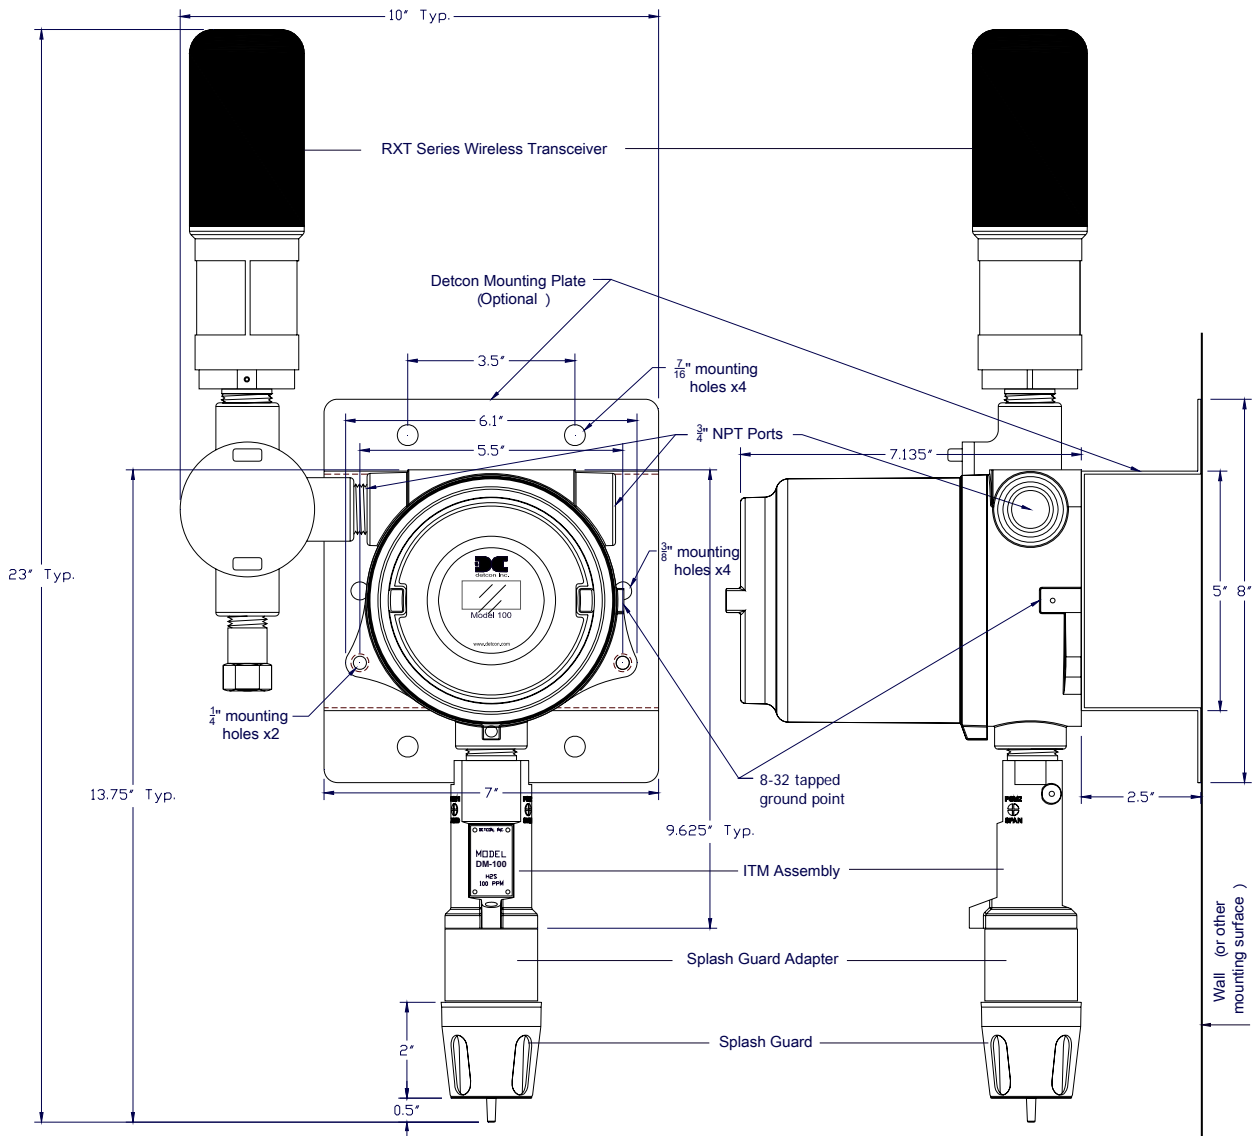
Typical Wireless DM-100 Assembly w/Optional Mounting Plate and Mounting Dimensions
